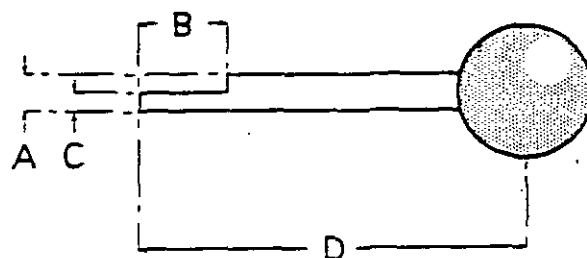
TOOL FOR COMPRESSING DETENT SPRINGS
